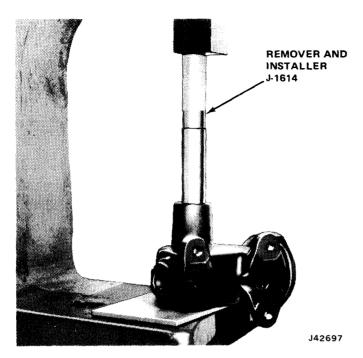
Removing—Installing Pitman Shaft Bushing
